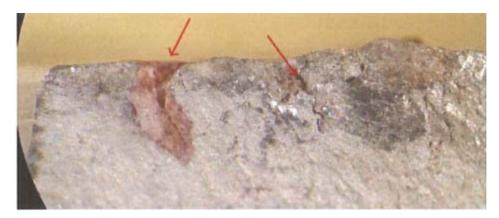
Starting point of fracture can be seen in figure 3 marked as 1b. The left arrow points to a crack where corrosion has collected (the area has been dyed slightly red). The right arrow points to a crack.
